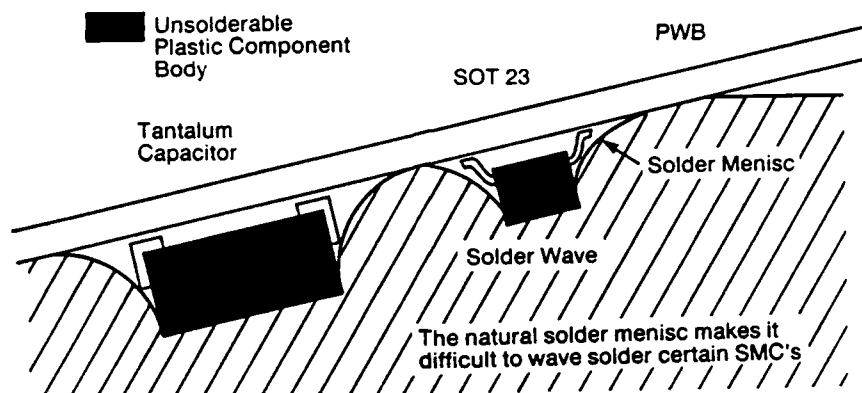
POSSIBILITY TO FEED SOLDER TO THE JOINT
